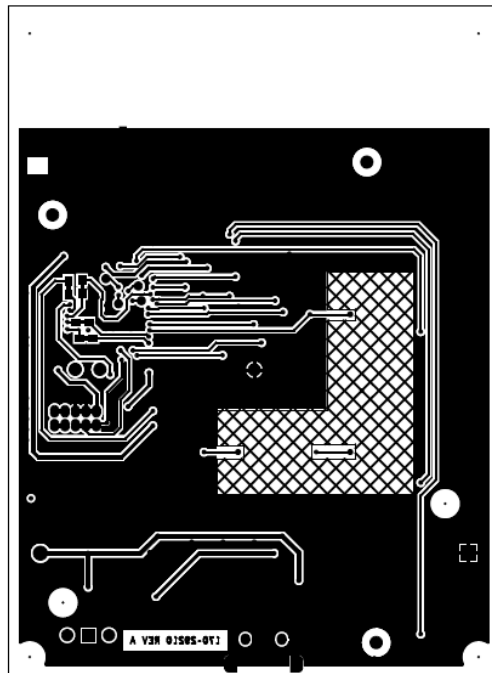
KW01-RCD-RD reference board layout (bottom view)
